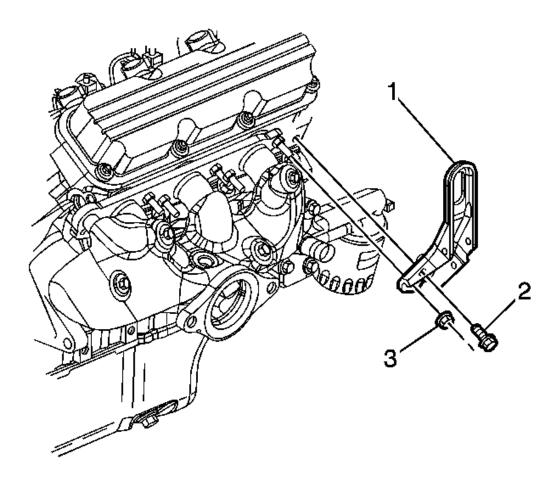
Right Engine Lift Bracket Bolt & Nut Courtesy of GENERAL MOTORS CORP.
